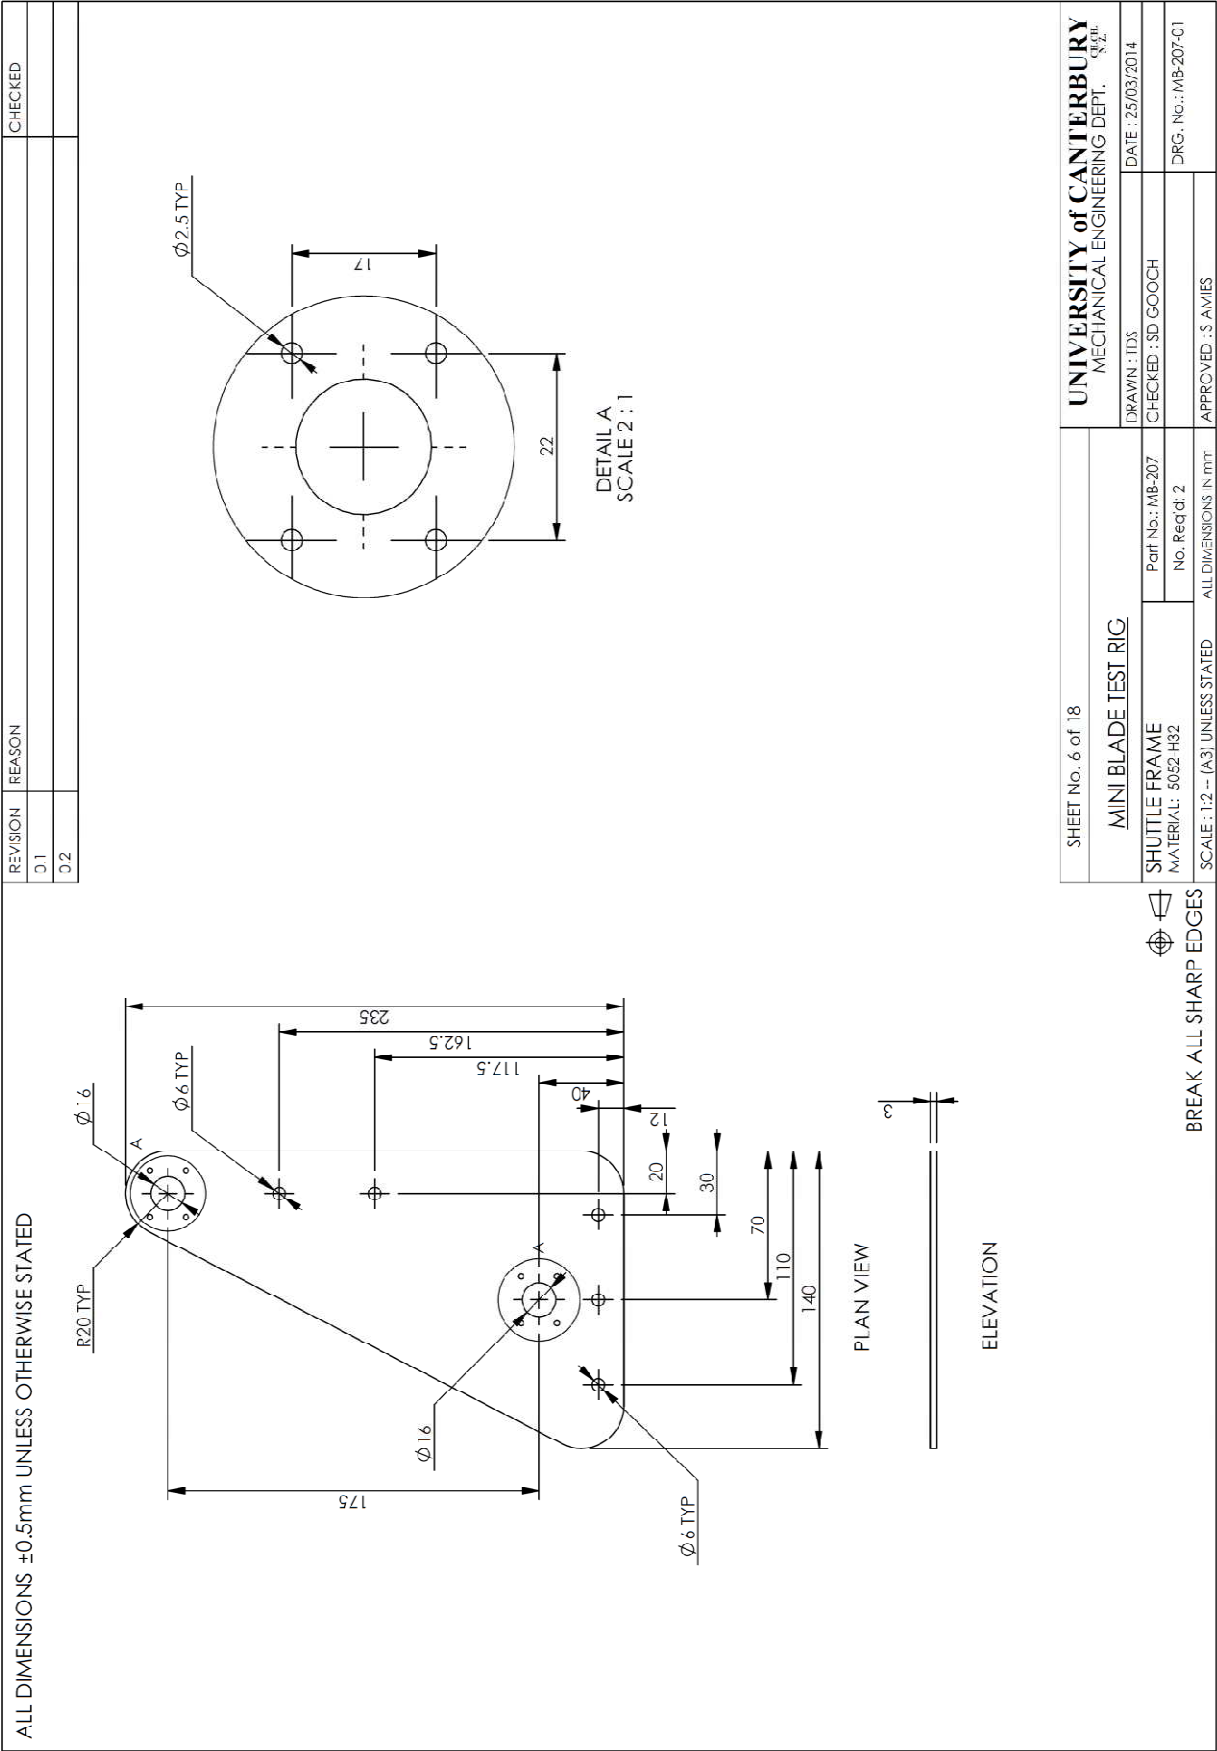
Manufacturing drawing for the shuttle frame in variable stroke test rig.
